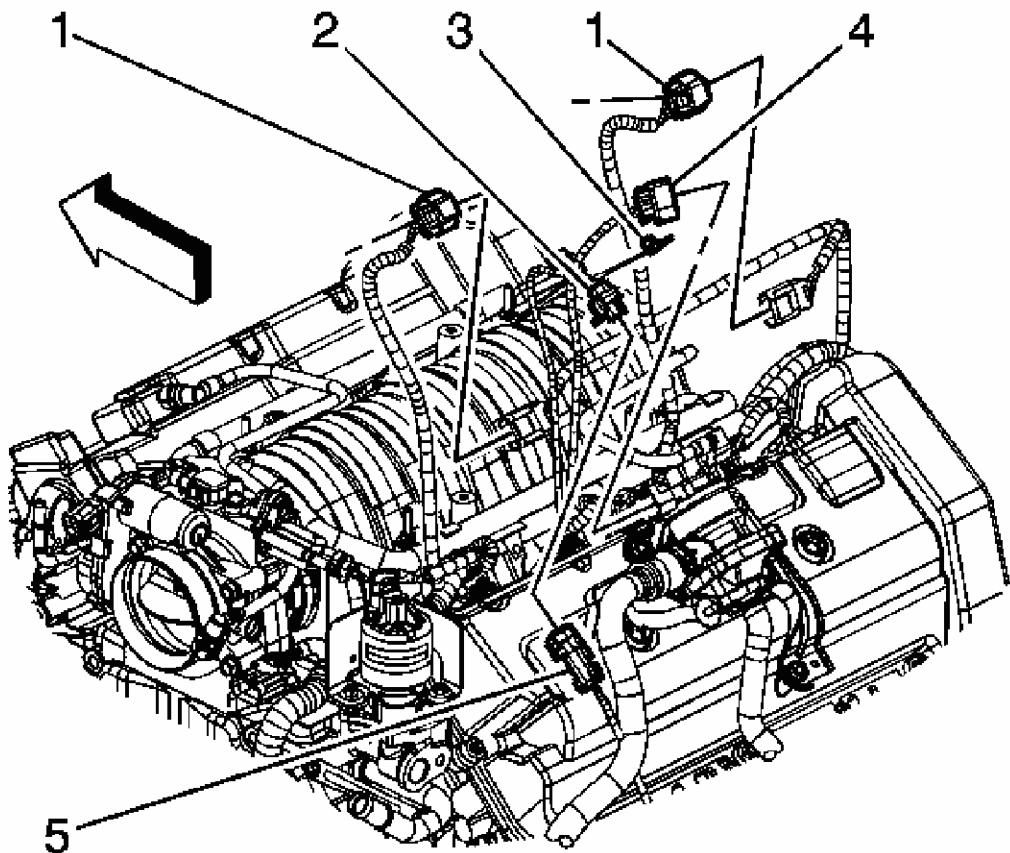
Identifying Engine Harness Electrical Connector To Starter Solenoid
